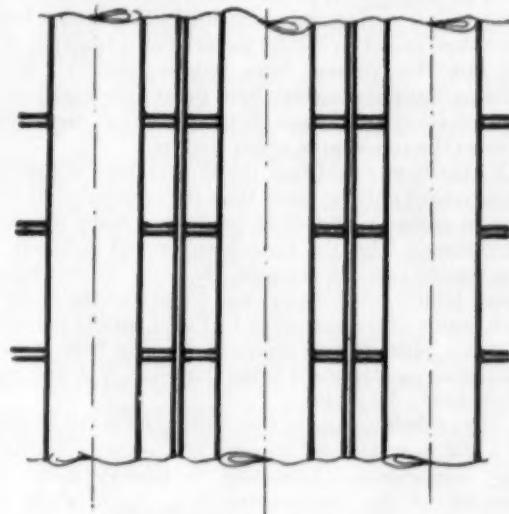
Earlier bare tube, slag-tap furnaces used welded-on fins about 1 in. wide and about $\frac{1}{2}$ in. thick with 5-mm gaps between fins.
